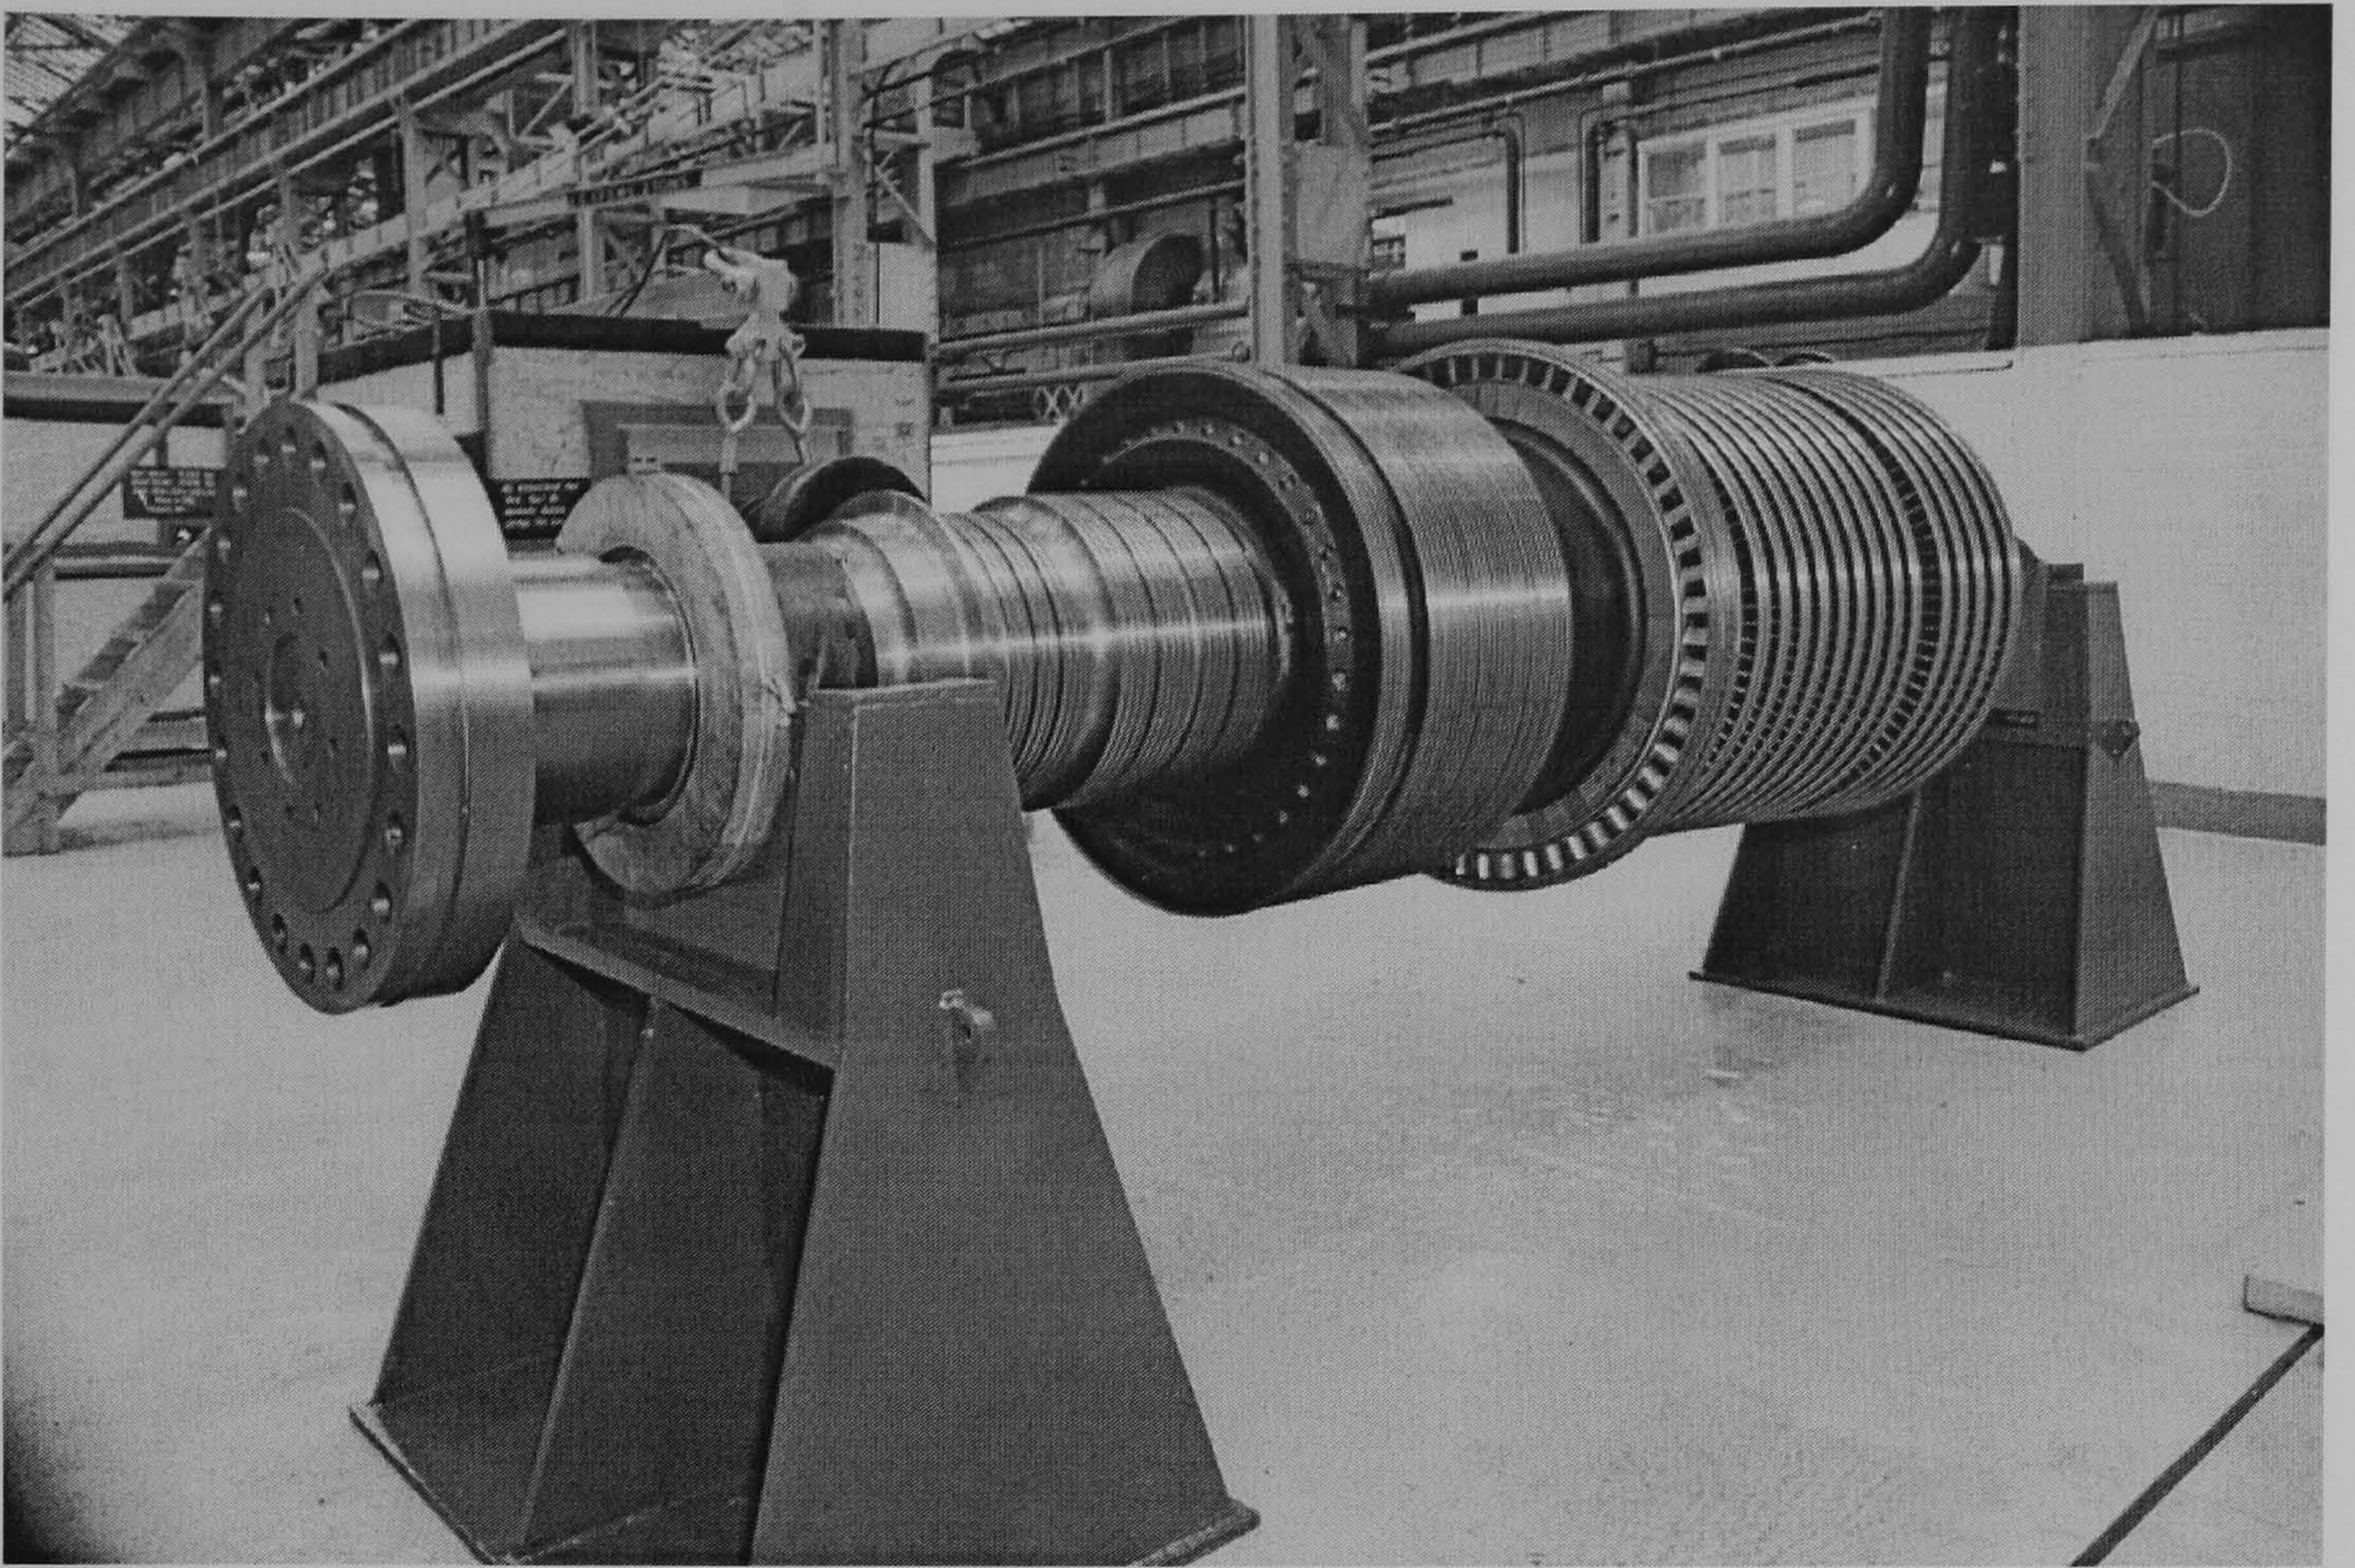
Turbine rotor shaft showing rows of rotating blades.
